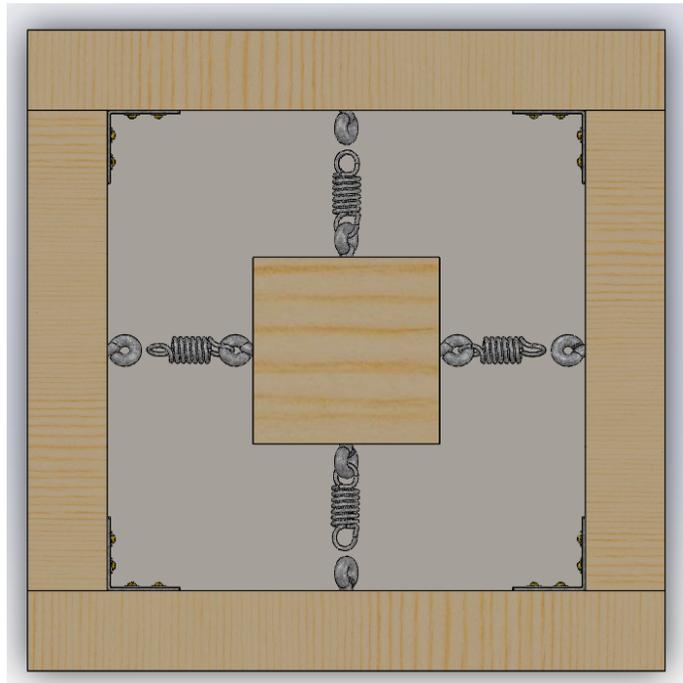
Bottom view of the proposed dock deformation mechanism assembly, outside of the 1 ft. x 1 ft. square enclosure is fixed to an existing fixed dock
